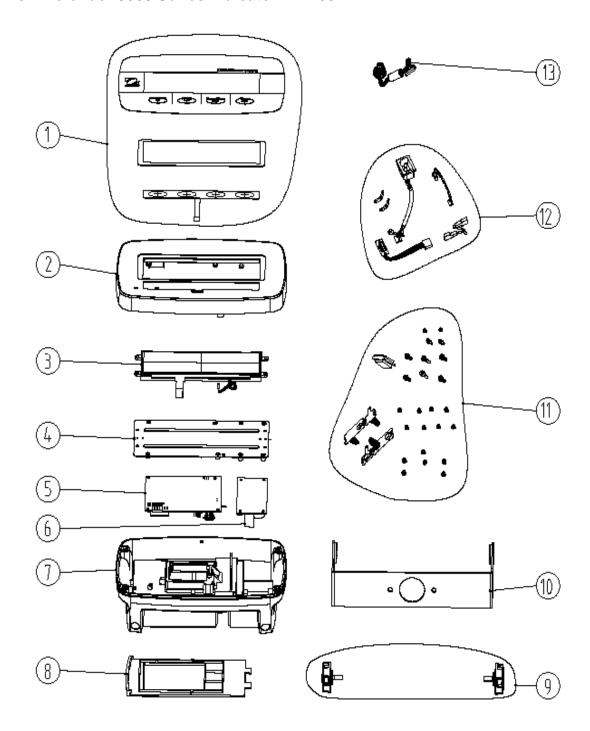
Defender 6000 series Indicator: i-DT61PW
